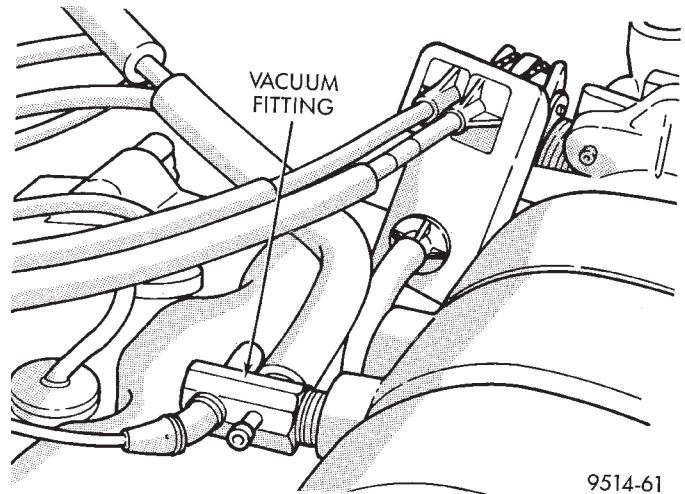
Vacuum Fitting at Rear of Upper Intake Manifold
